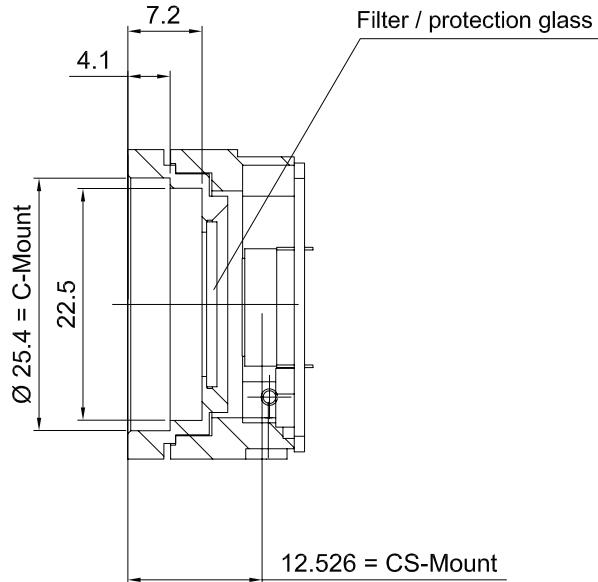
Guppy CS-Mount dimensions (new CS-/C-Mounting)
